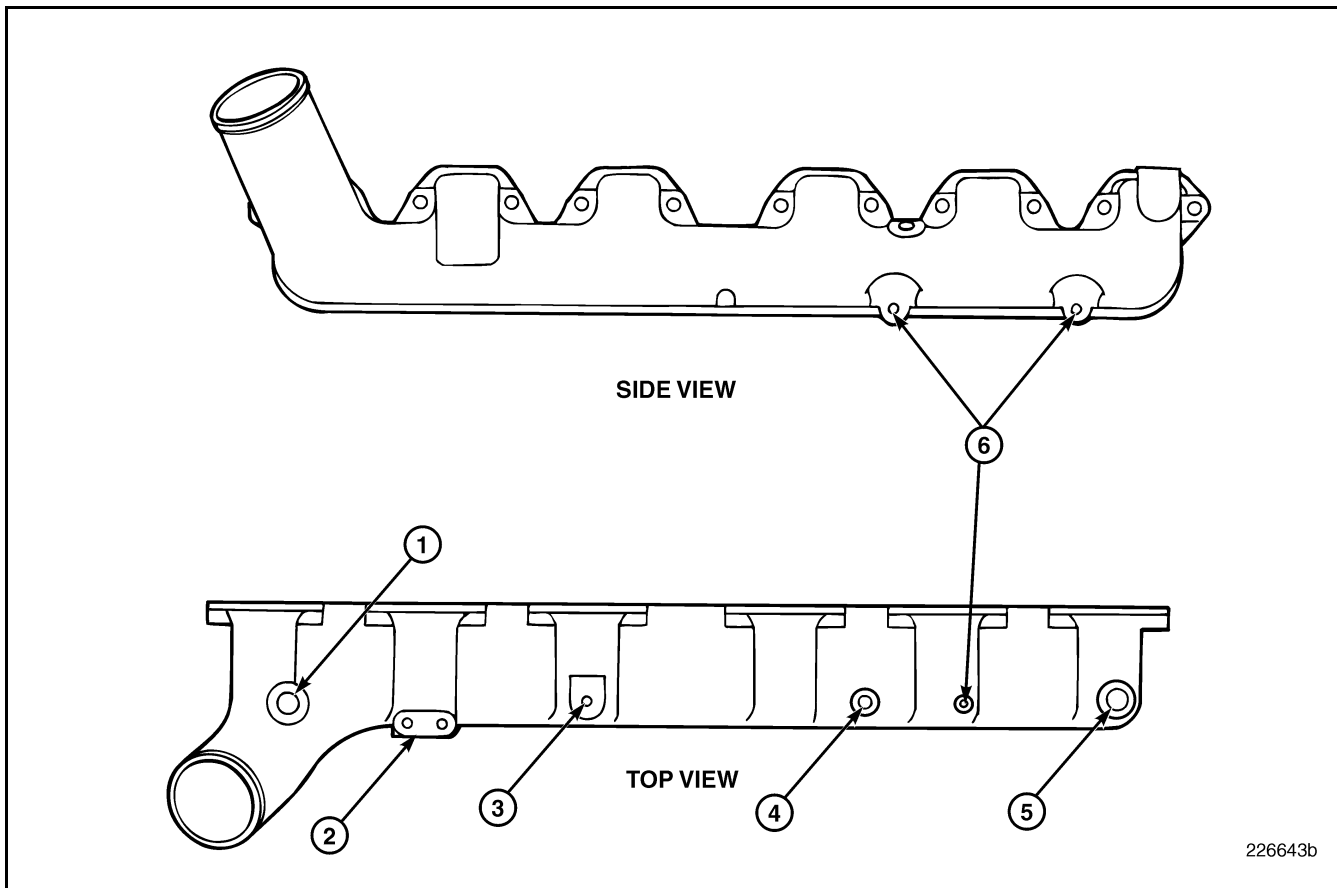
V-MAC III Sensor Locations with Front Air Inlet Manifold (Left-Side Mounted EECU)
